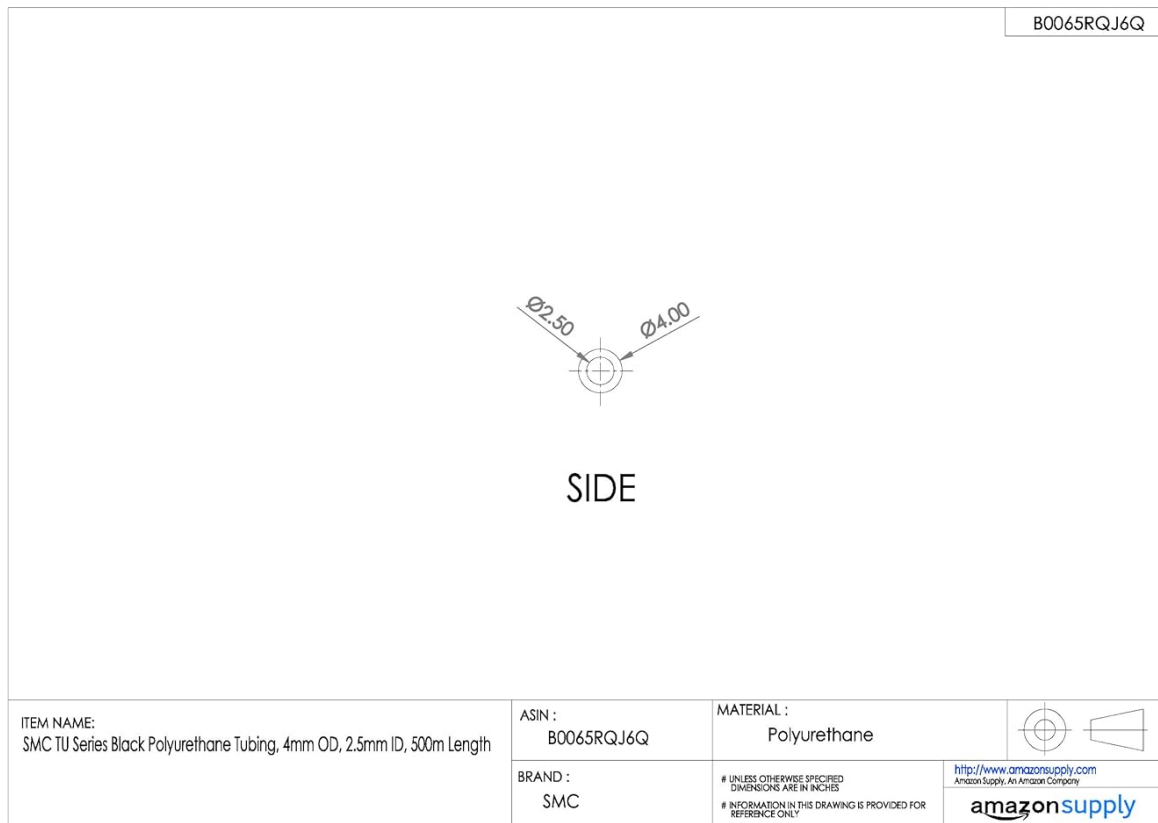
Side view technical drawing of the tubing, illustrating both the outer and inner diameters.
